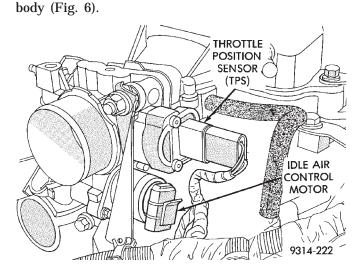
Electrical and Vacuum Connection to Throttle Body
